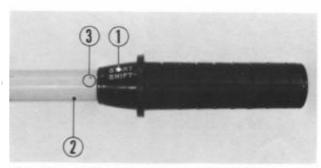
① Grip pipe cover ② Red mark ② Handle
